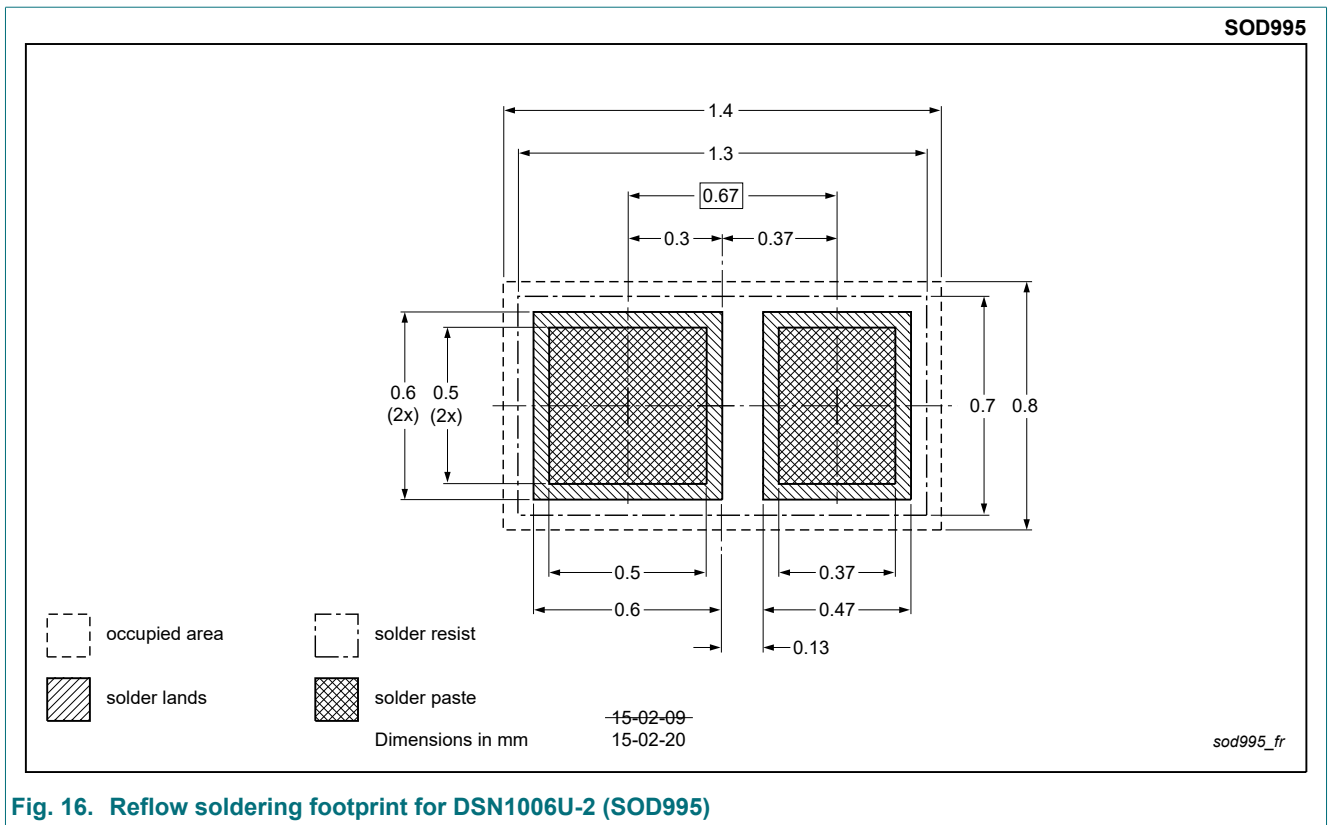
Reflow soldering footprint for DSN1006U-2 (SOD995)
